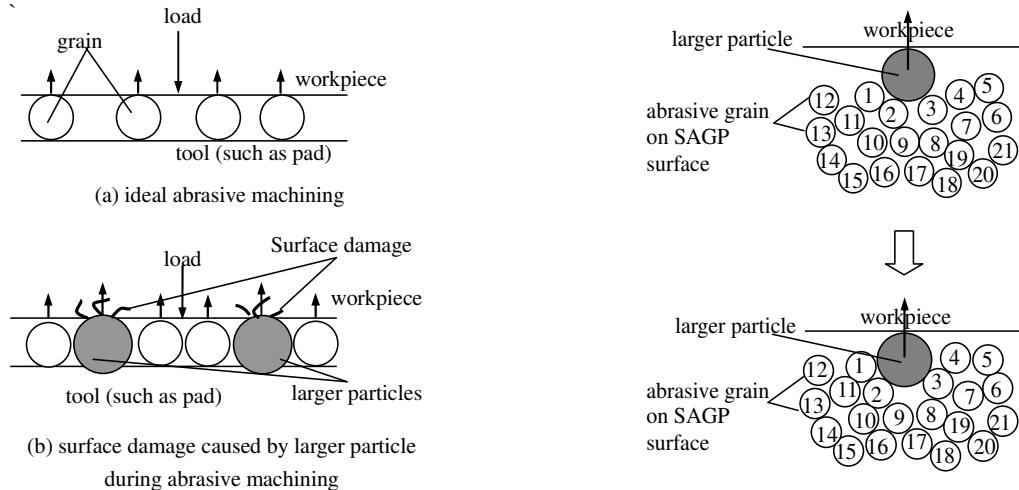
Illustration of surface damage caused by larger particle during abrasive machining
